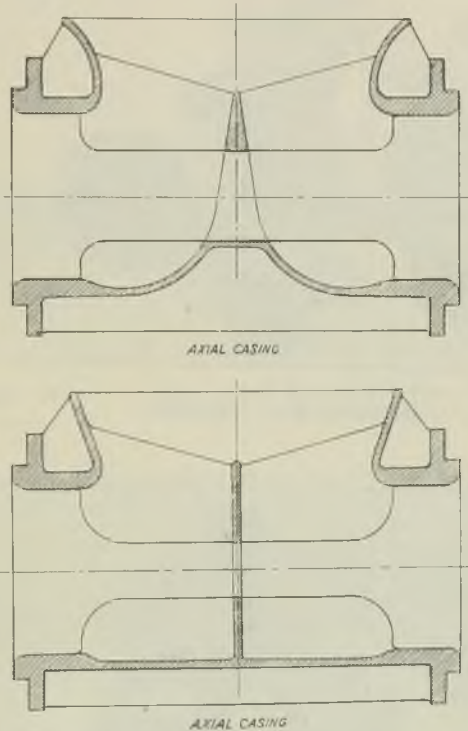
UPPER SKETCH "AS DESIGNED,"
